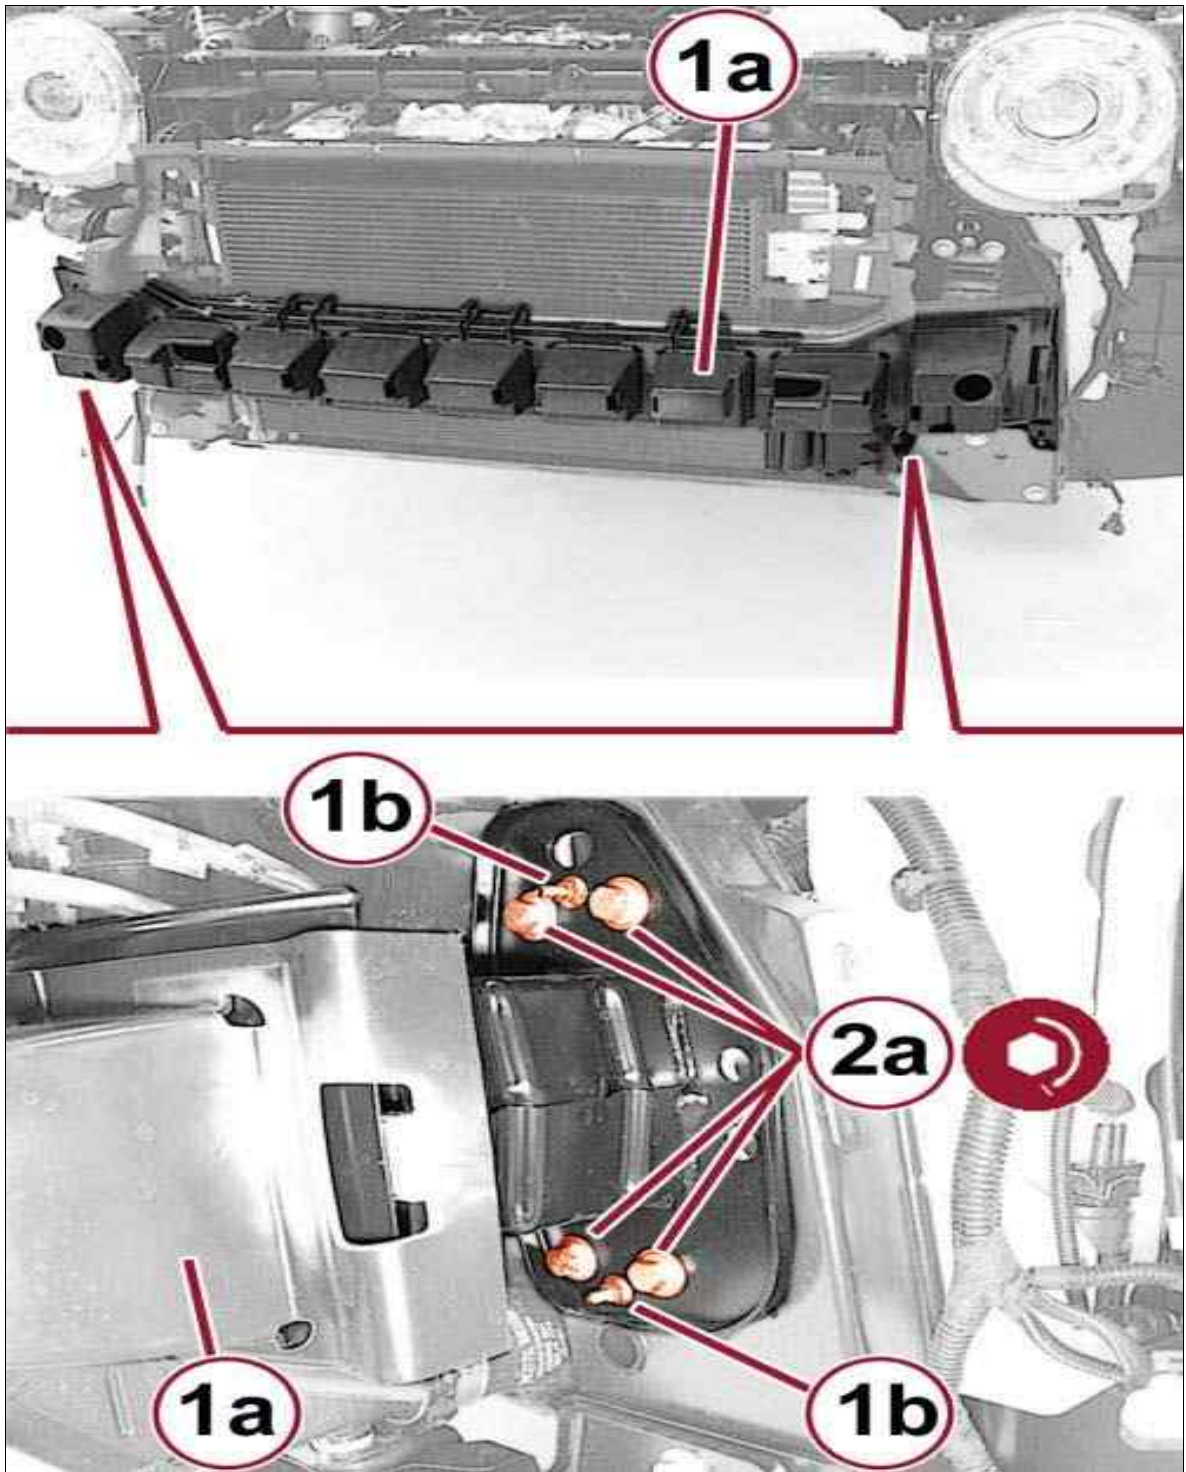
Air Duct & Bolts, Seats & Retainers & Air Cooler
